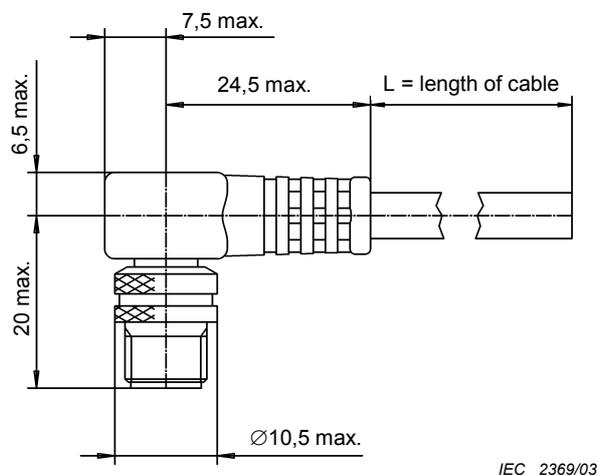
Non-rewireable connector, angled version, with locking nut, male contacts
